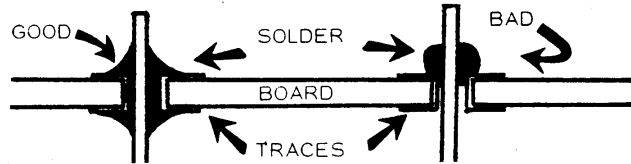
CROSS-SECTION OF A PC BOARD SHOWING GOOD AND BAD SOLDER CONNECTIONS
